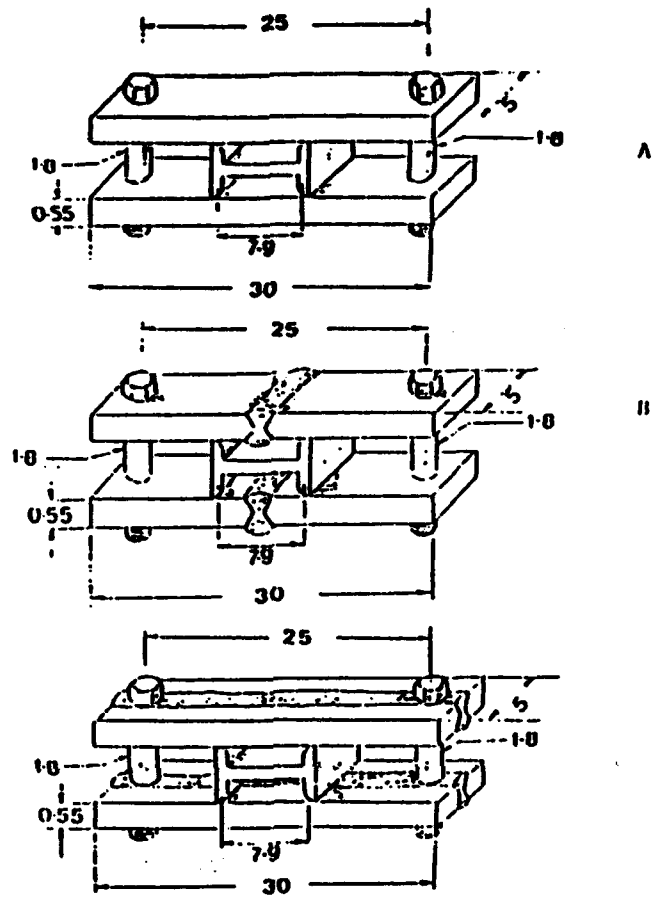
the details of design of constant strain test specimens used in this study, (a) without welding, (b) transverse welds, (c) longitudinal welds.
